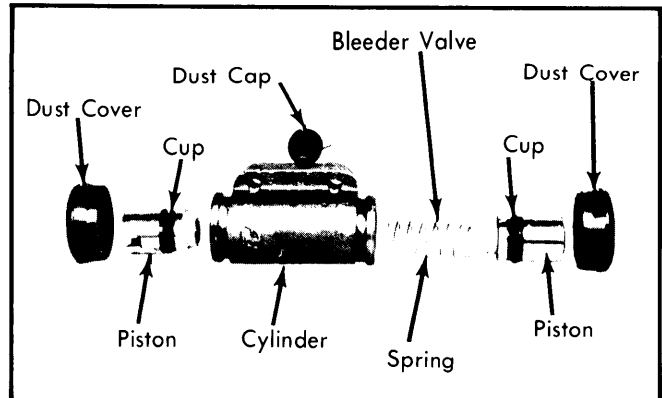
Exploded View of 320i Rear Wheel Cylinder
